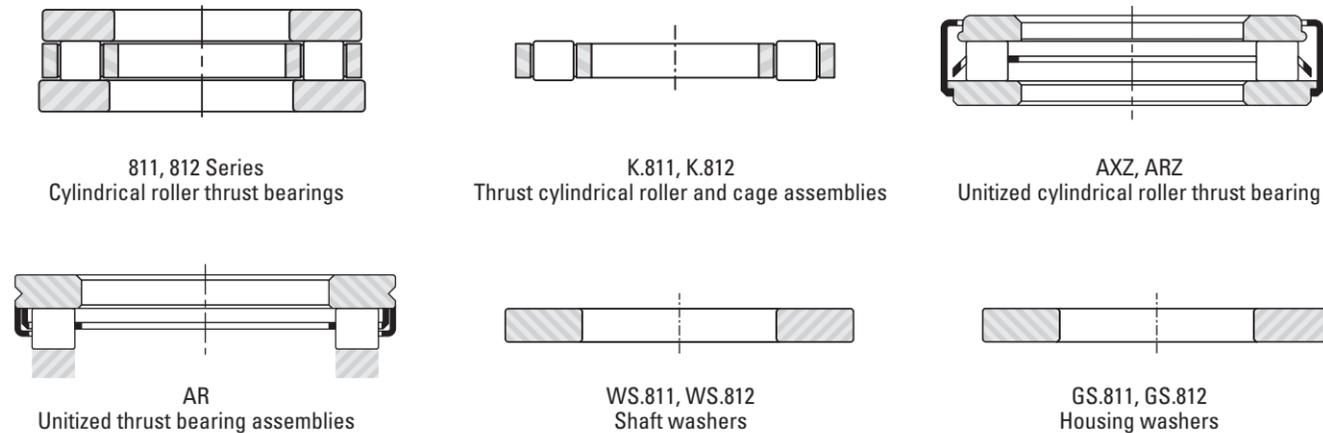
Types of metric series cylindrical roller thrust bearings and their components
